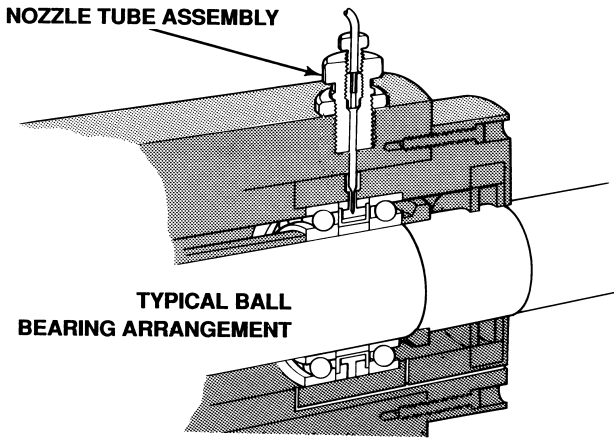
Nozzle assembly of oil mist system. (Reprinted with permission from Lubriquip Inc.)
